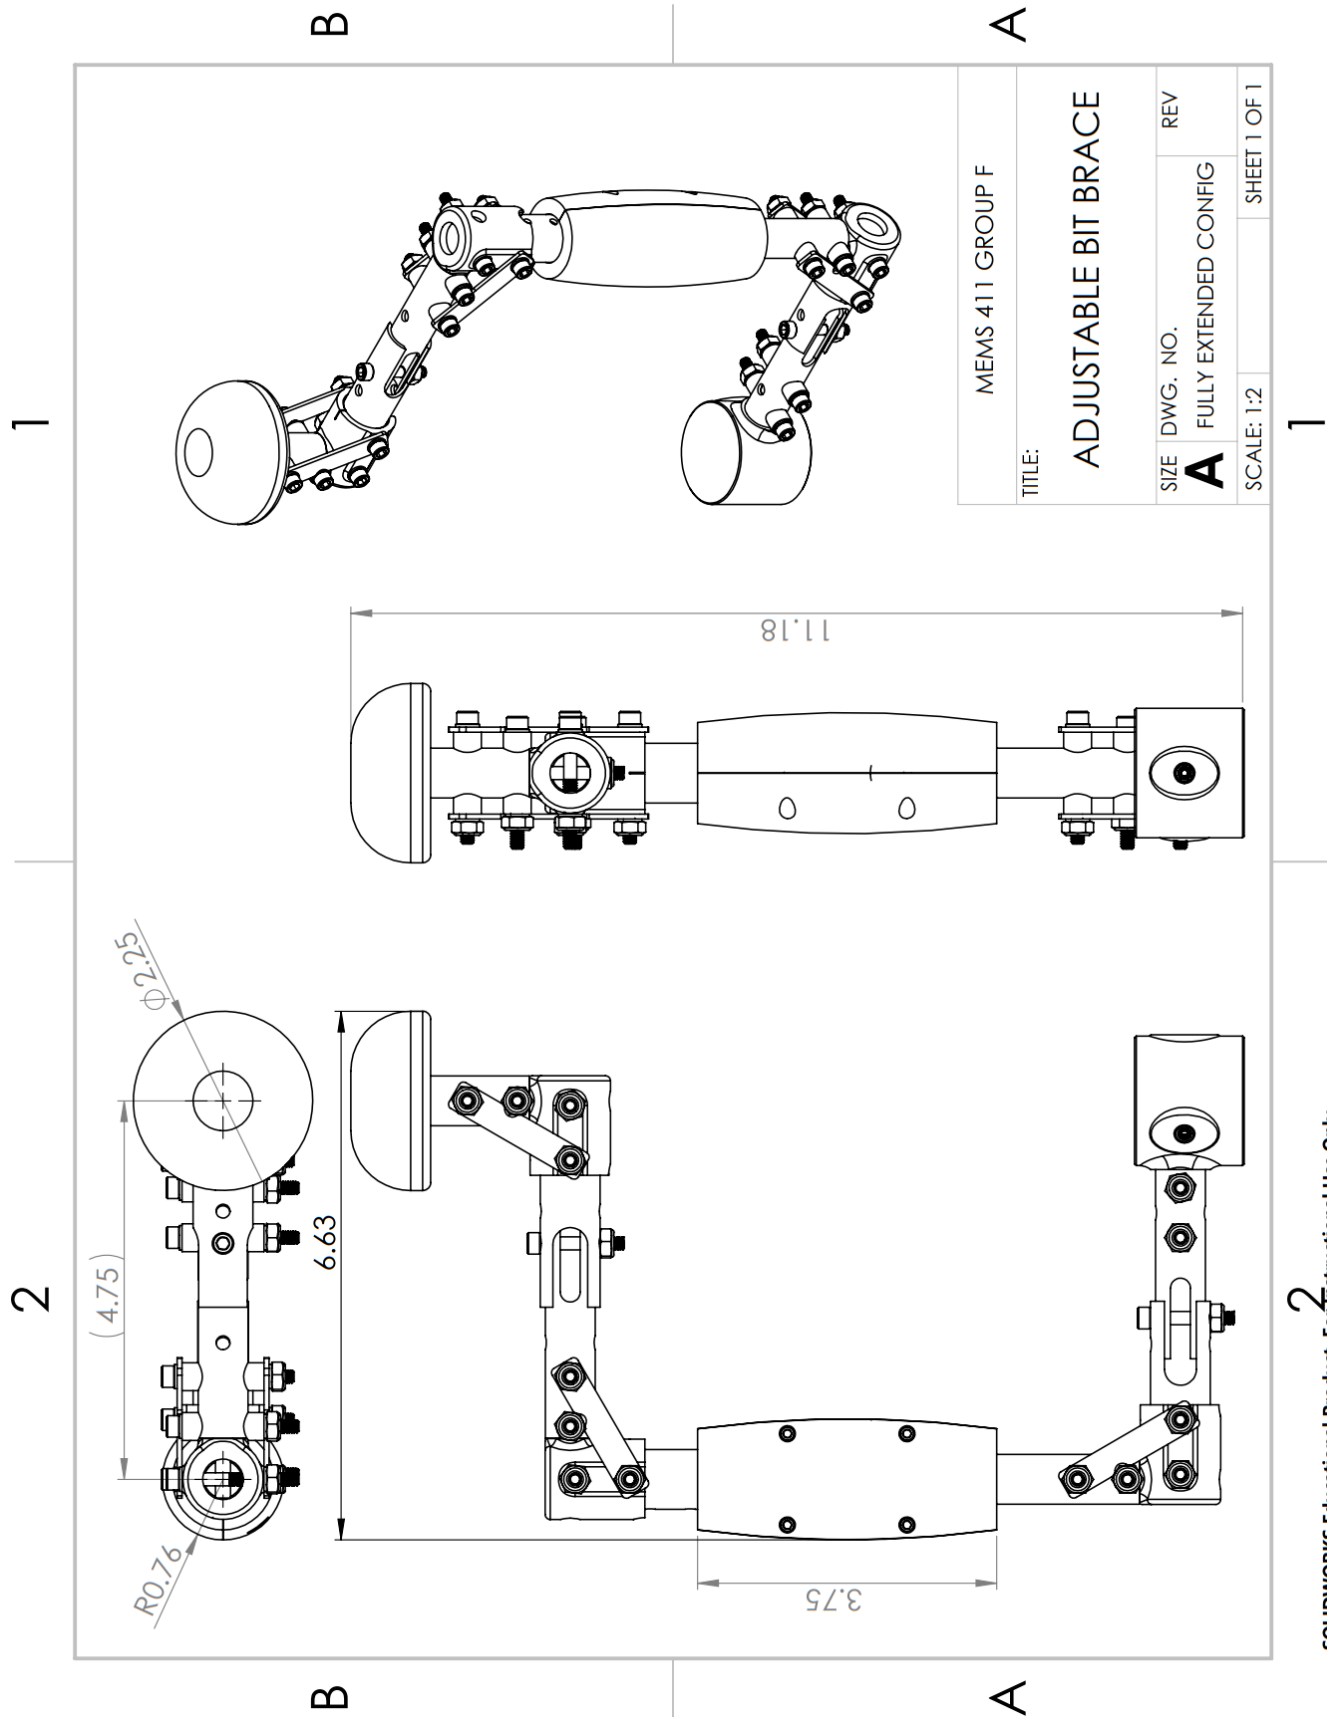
Assembled Bit Brace Extended Configuration with overall dimensions
